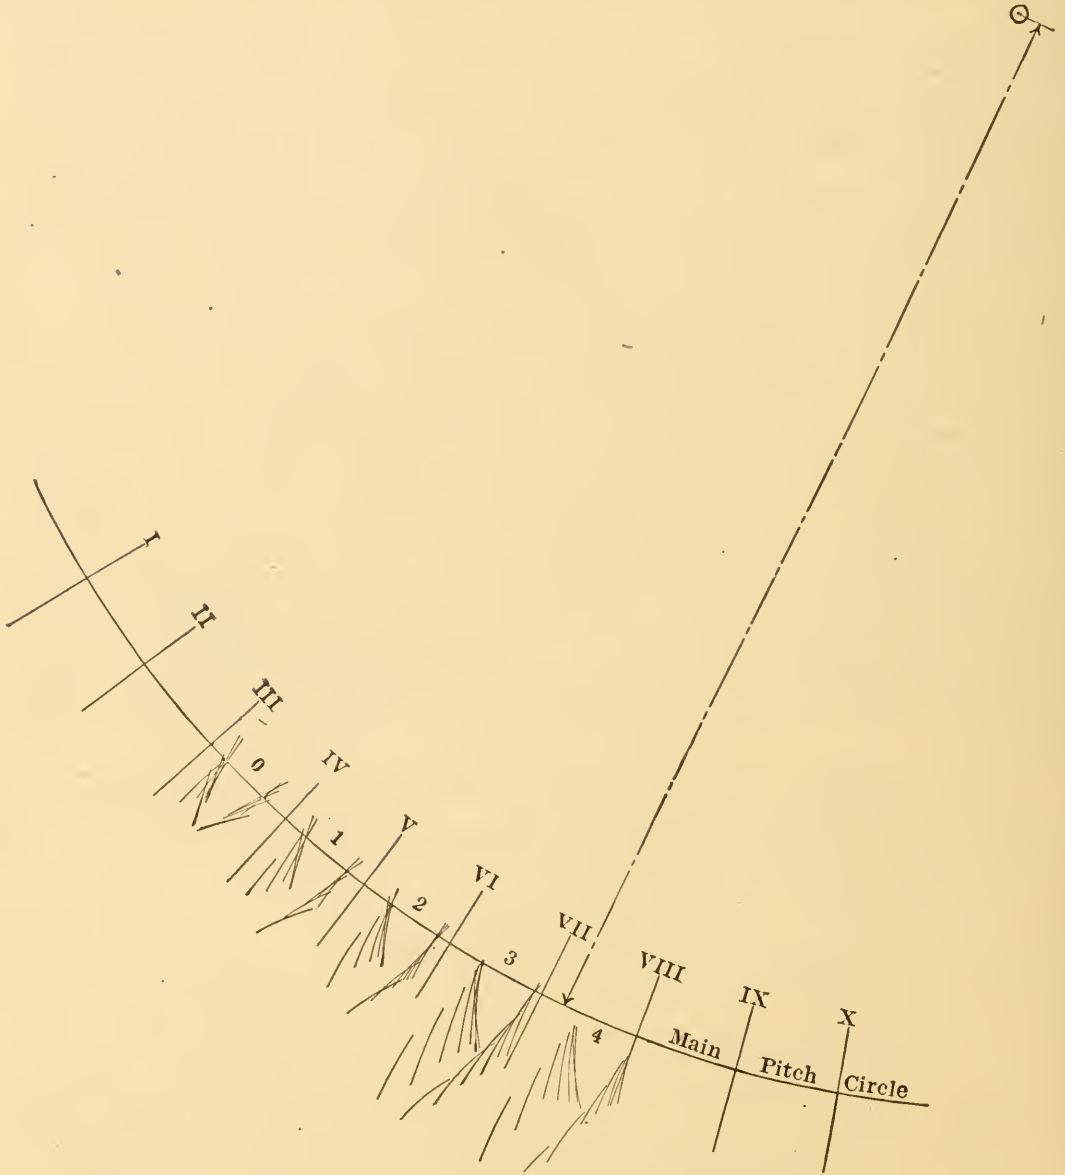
LAYING OUT THE GEAR SECTIONS.
